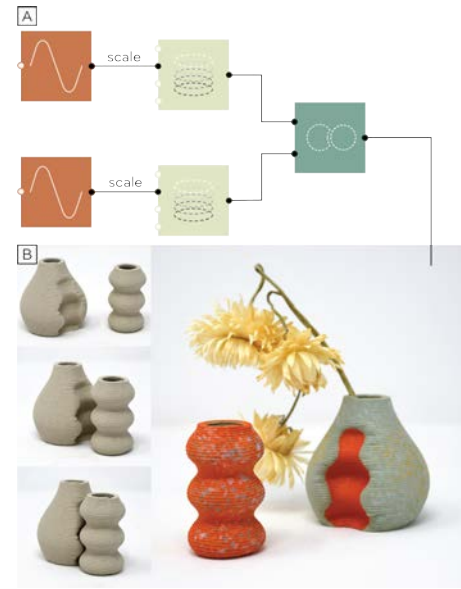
Boolean difference operator in CoilCAM. A) Two toolpath unit generators are shaped using a sinusoidal operator on the scale shaping parameter and combined using a Boolean difference operator. B) This approach creates complementary vessels that can fit in one another.
